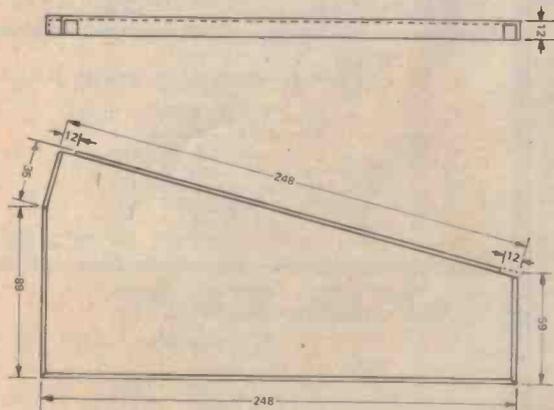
The end pieces for the box. These should be fitted into the ends of the box as shown in Fig. 3. The two ends should be of opposite hands.
